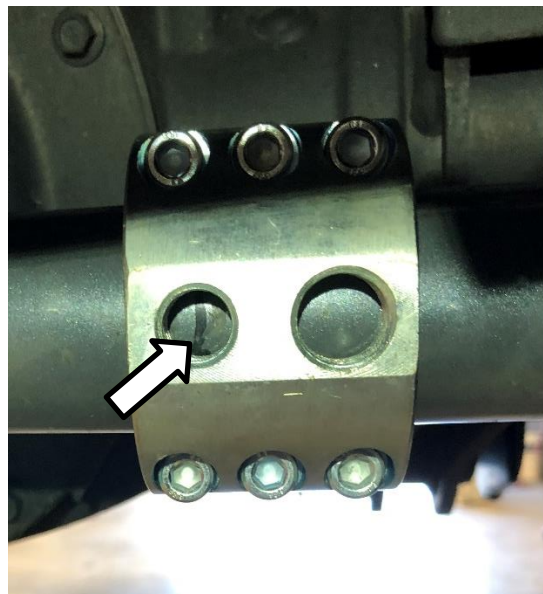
Stabilizer Clamp Installed on 8702 Tie Rod with the 1/2" Hole Over the Mounting Location Mark.
